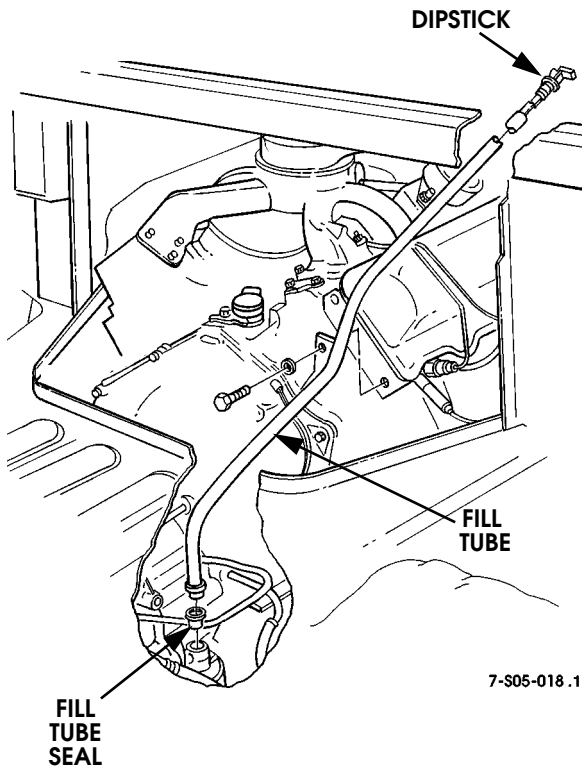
Fill Tube Attachment (NA Diesel Shown)
